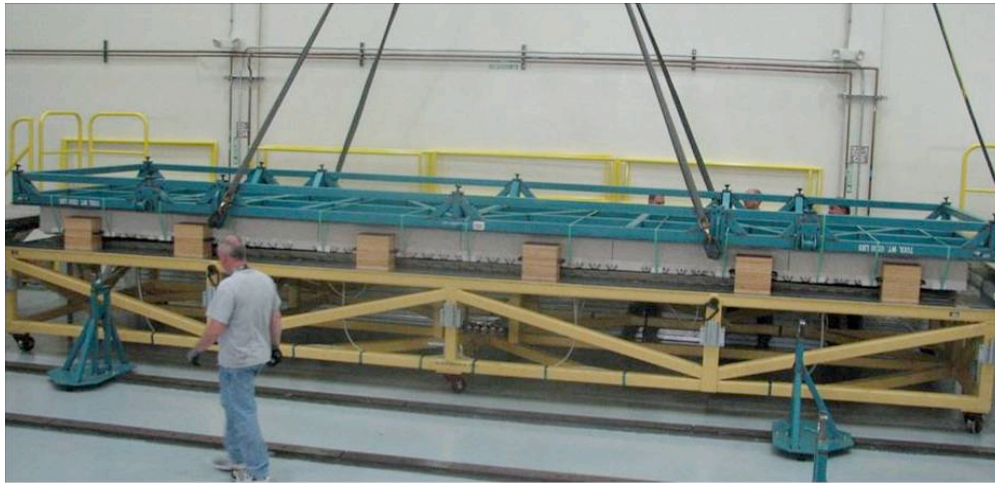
Stitch Tool and Preform Placed onto Cure Tool
